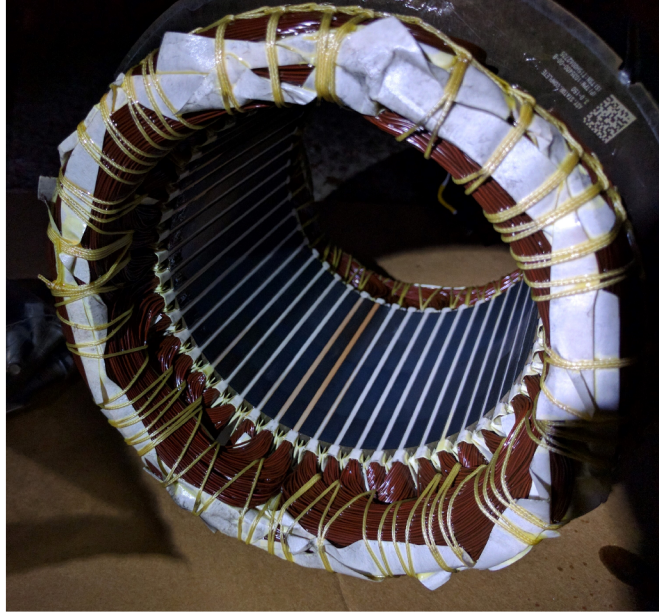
Tesla Model S stator steel pack with winding. Reprinted from [16].
